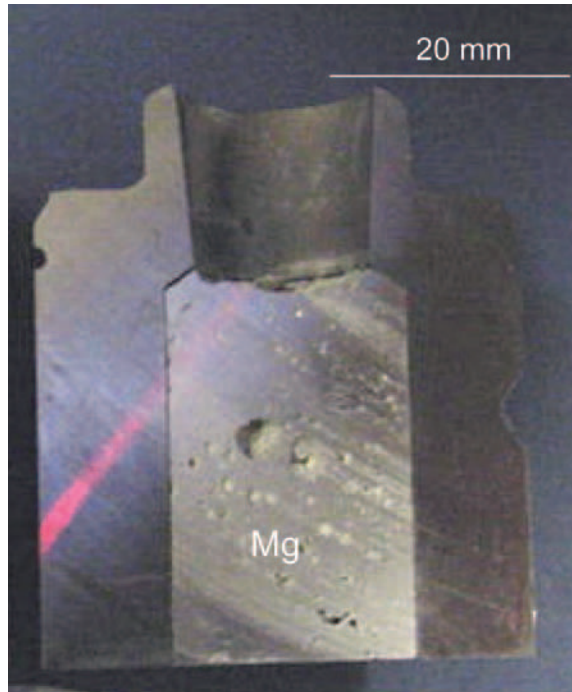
A cross section through the machine nozzle showing the plug held by an undercut within the nozzle channel
